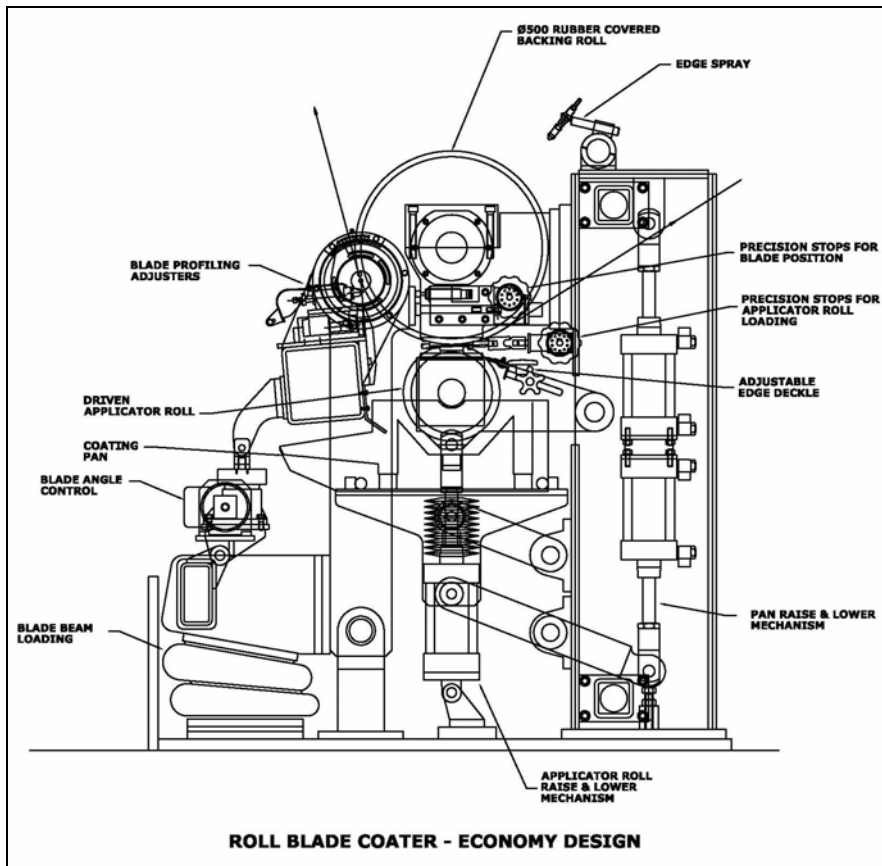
Flooded Nip Roll Blade Coater – Economy design for slower and narrower machines.
